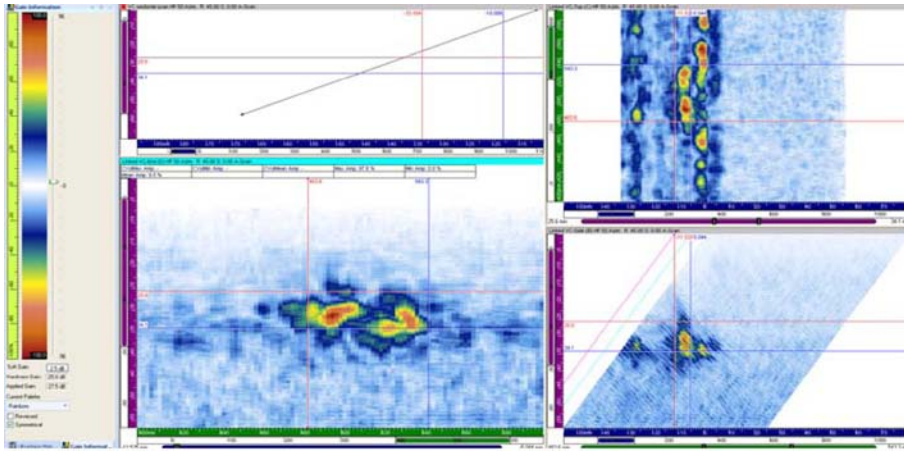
Specimen 9C-034 Flaw 4 Before Weld Crown Removal at 1.5 MHz, 55 Degrees with a No Detection
